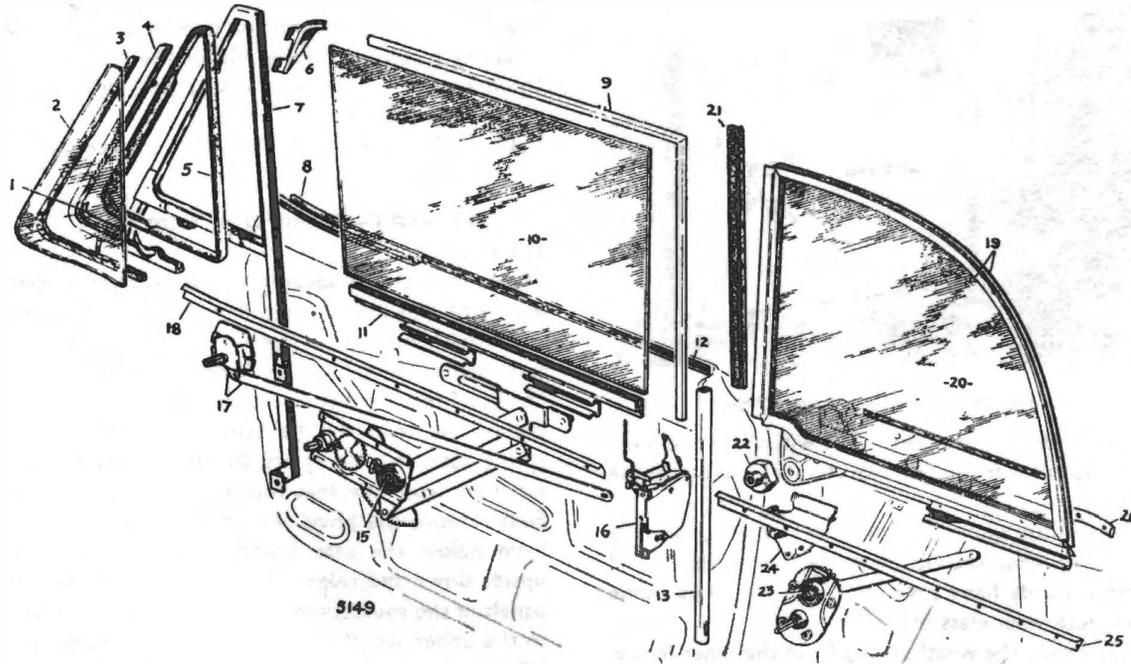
Door glasses and mechanism (Rapier Coupe)
